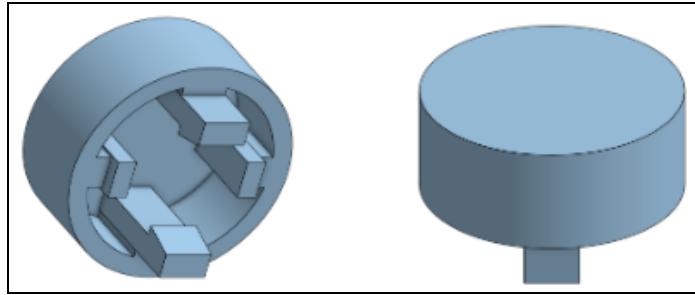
Button caps. Bottom isometric view (left). Top isometric view (right).
